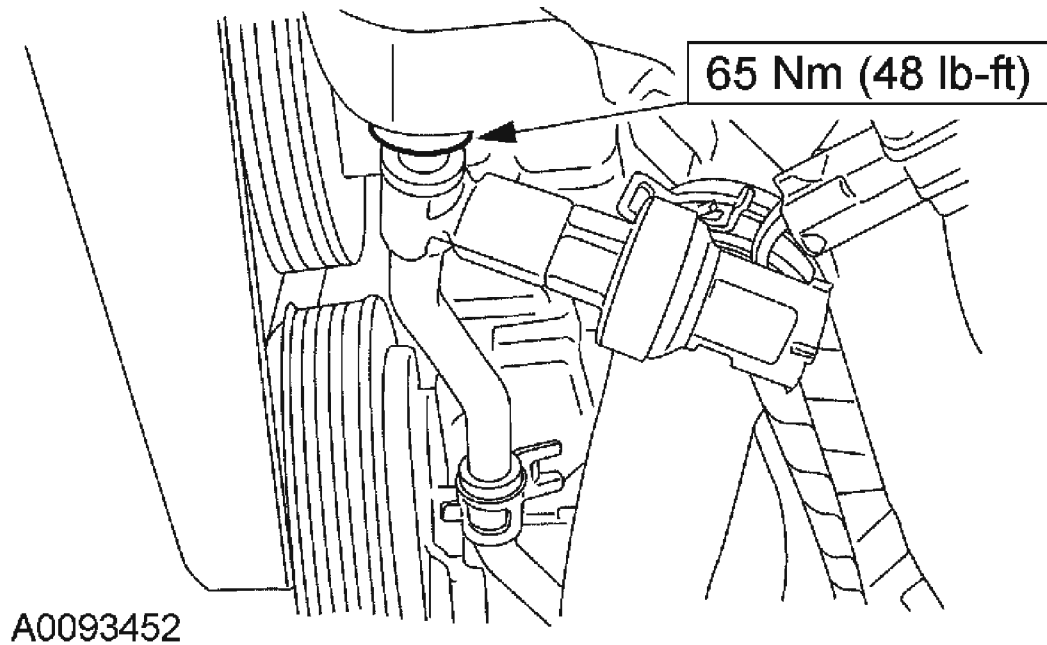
Disconnecting Power Steering Pressure Line Fitting Nut From Power Steering Pump
